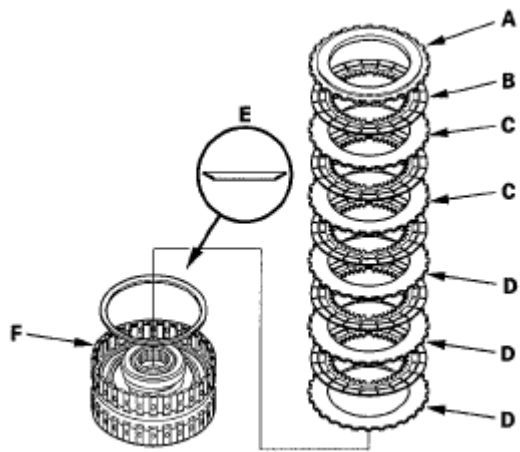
Identifying Clutch End Plate, Clutch Discs, Clutch Wave-Plates And Clutch Flat-Plates
